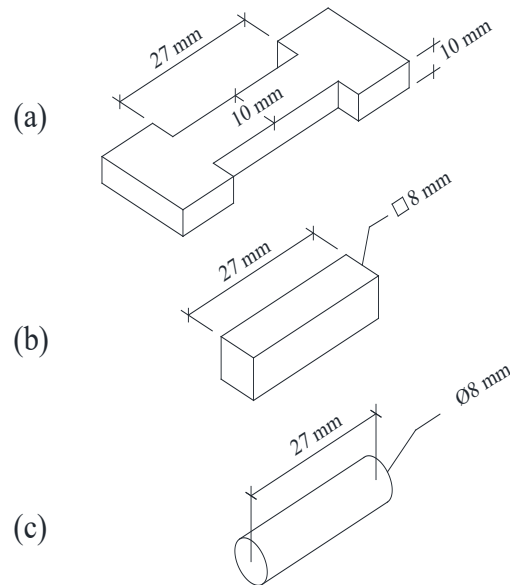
(a) Tensile test piece (b) Hardness test piece (c) Impact test piece
